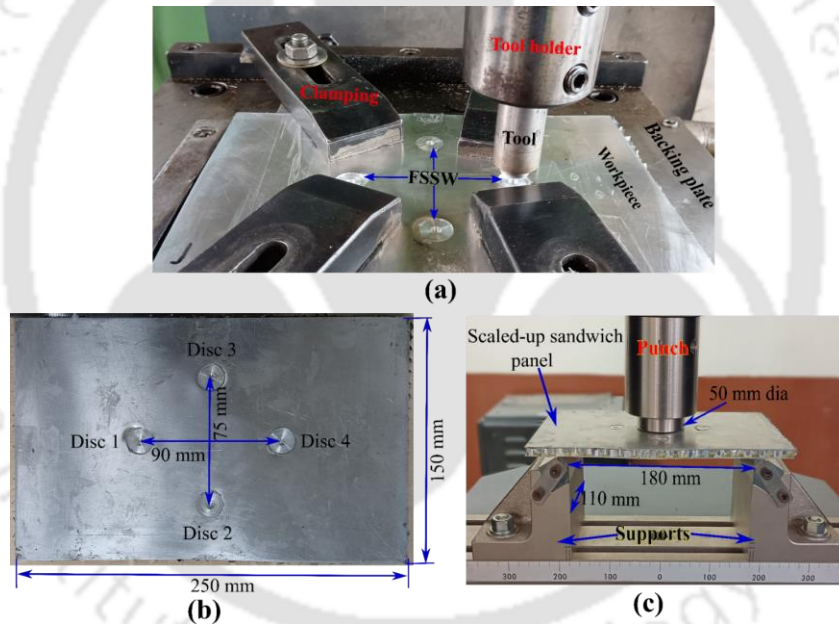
Scaled-up sandwich sheet forming (a) fabrication setup on FSSW (b) sandwich panel fabricated by FSSW_D_AB (c) forming setup
